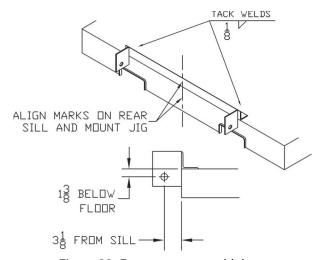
Fasten or spot-weld the assembly jig to the rear beam
